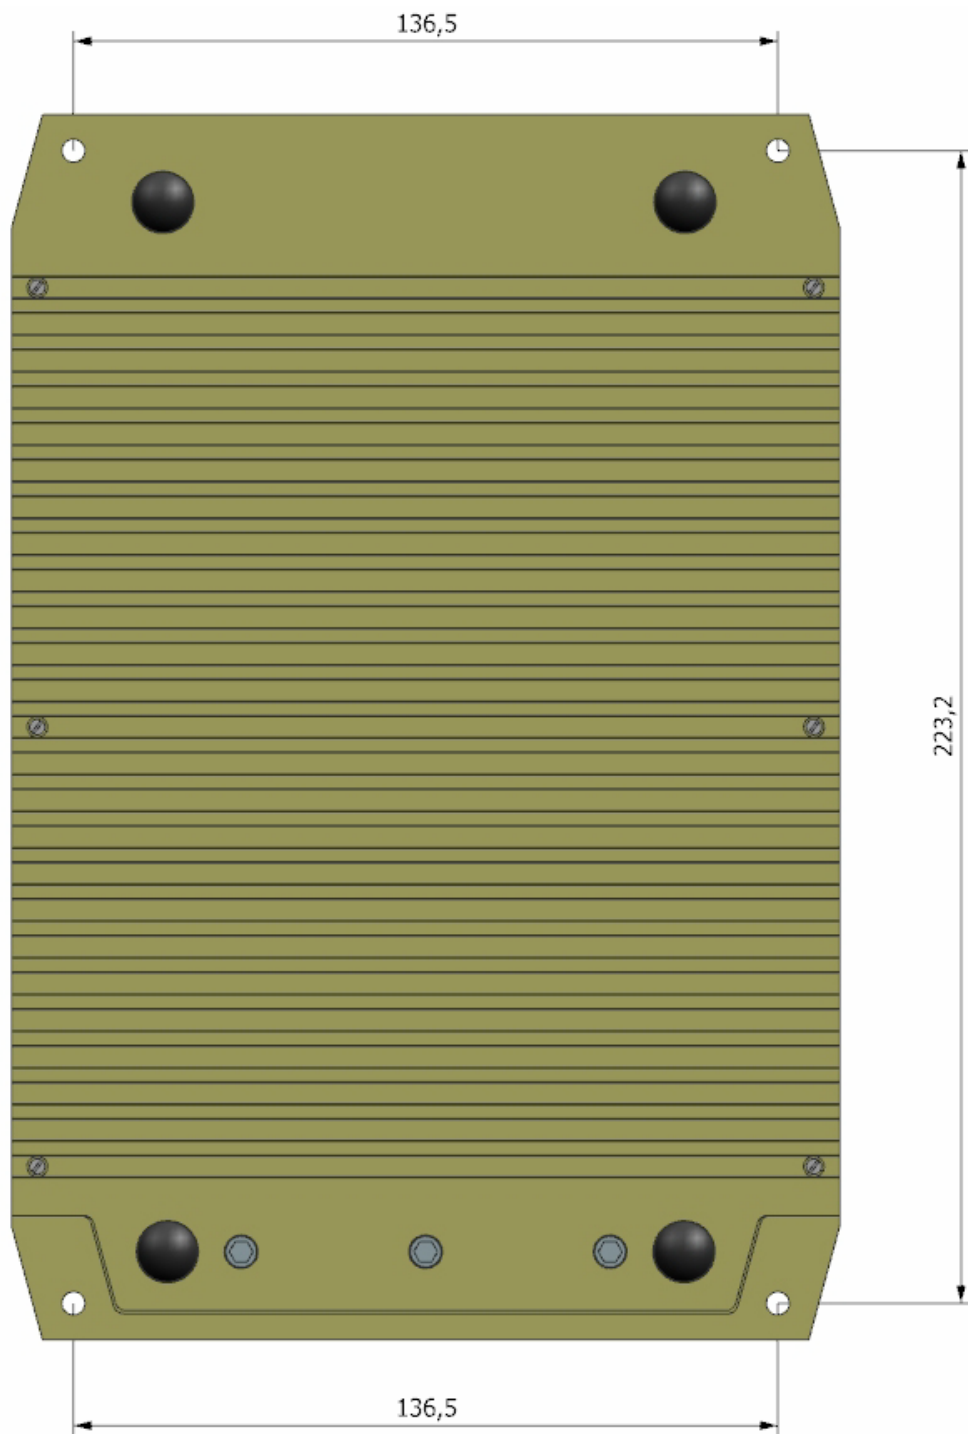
Dimensions in Bottom view. The 4 mounting holes are for M4 screws and washers.
